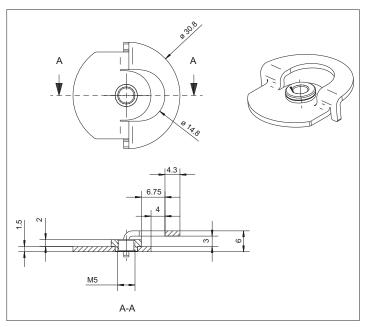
Dimension drawing of the HT 2 mounting bracket
